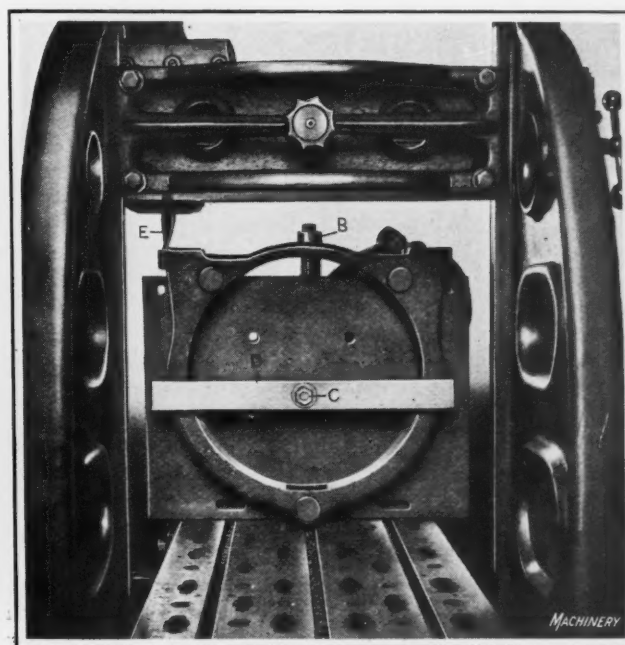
Opposite Side of the Work and Fixture for planing Stock Reel Supports
